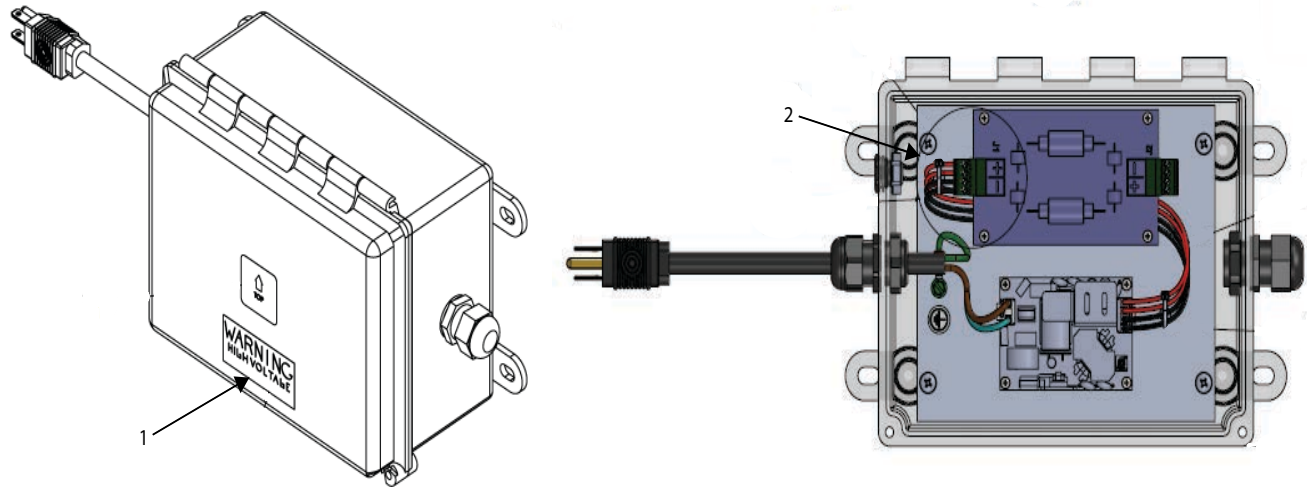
12 VDC Remote Power Supply Replacement Parts
